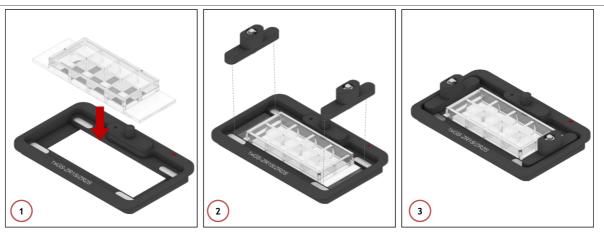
Sample holder for 1"x3" chambered cover glass holder.
